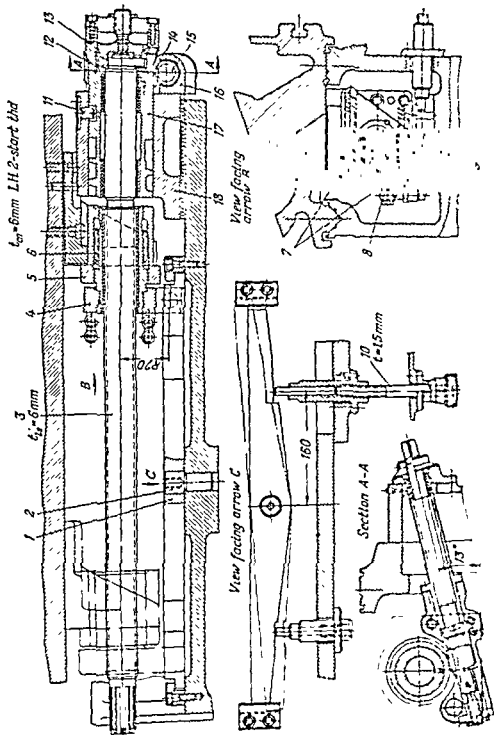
Pitch compensator and thread matching device of the model 3B-2 thread grinder:
